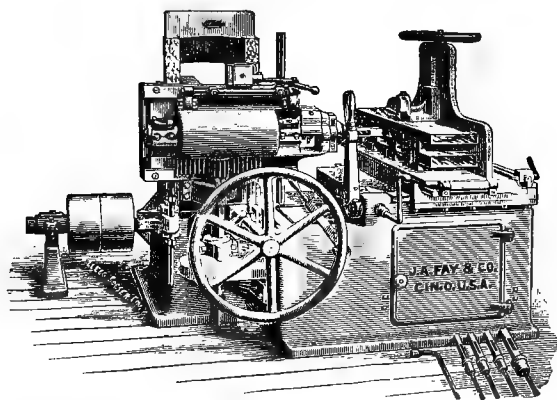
Large mortising machine ; by J. A. Fay & Co., United States.
